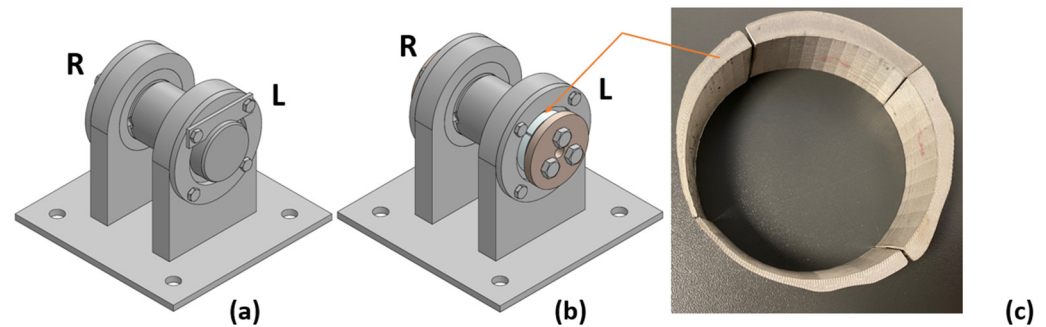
Test equipment, with (a) the cylindrical pin, (b) expanding pin, and (c) 3D-printed boss on the left (L) support of the expanding pin.
